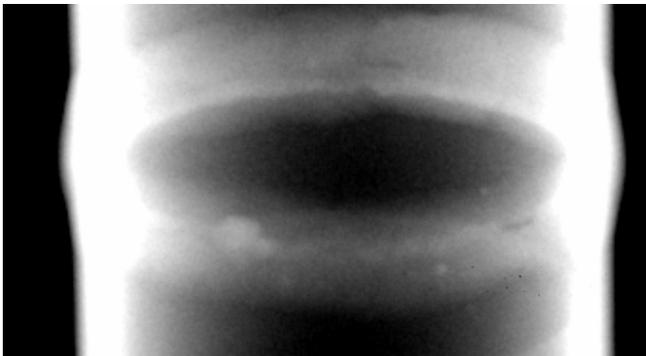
DR image of a weld defect – Excess penetration and lack of fusion
